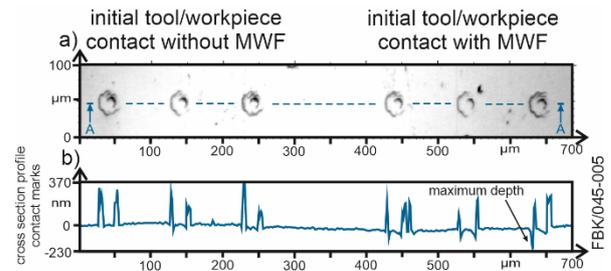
Depth profile evaluation of the contact marks: a) top view of the workpiece surface, b) cross section A-A of the workpiece surface
